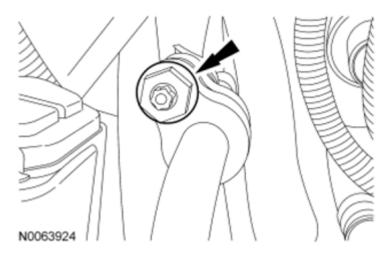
Locating A/C Pressure Tube Fitting Nut Courtesy of FORD MOTOR CO.
